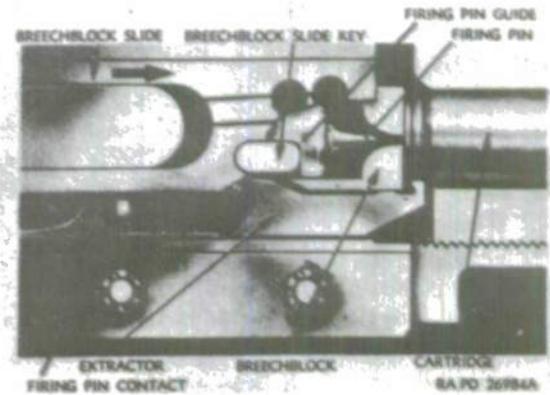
Bolt-type Breech Closure (Automatic Gun),
